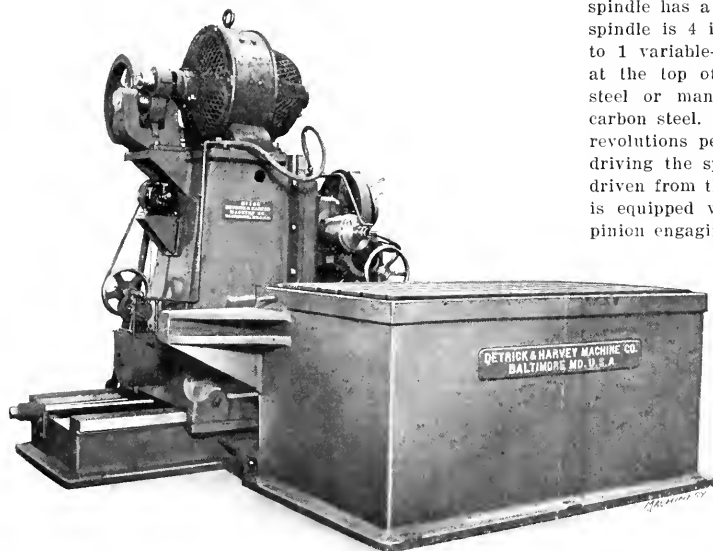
Detrick & Harvey Drilling Machine showing Table, Spindle, etc.
